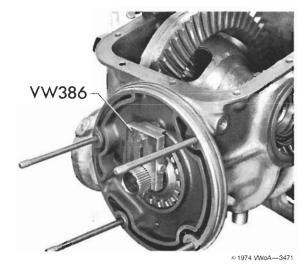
Spline clamp VW 386 bolted to the final drive housing to prevent the pinion from turning.
